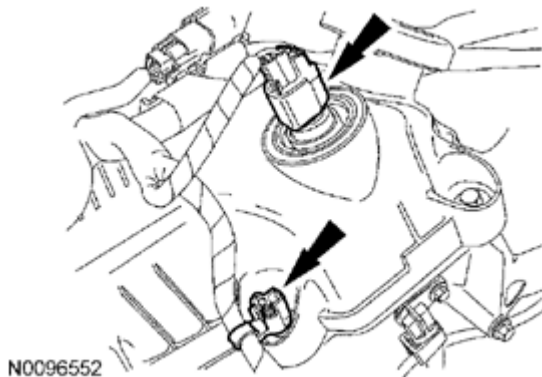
Locating RH Variable Camshaft Timing Electrical Connector And Wiring Harness Retainer
